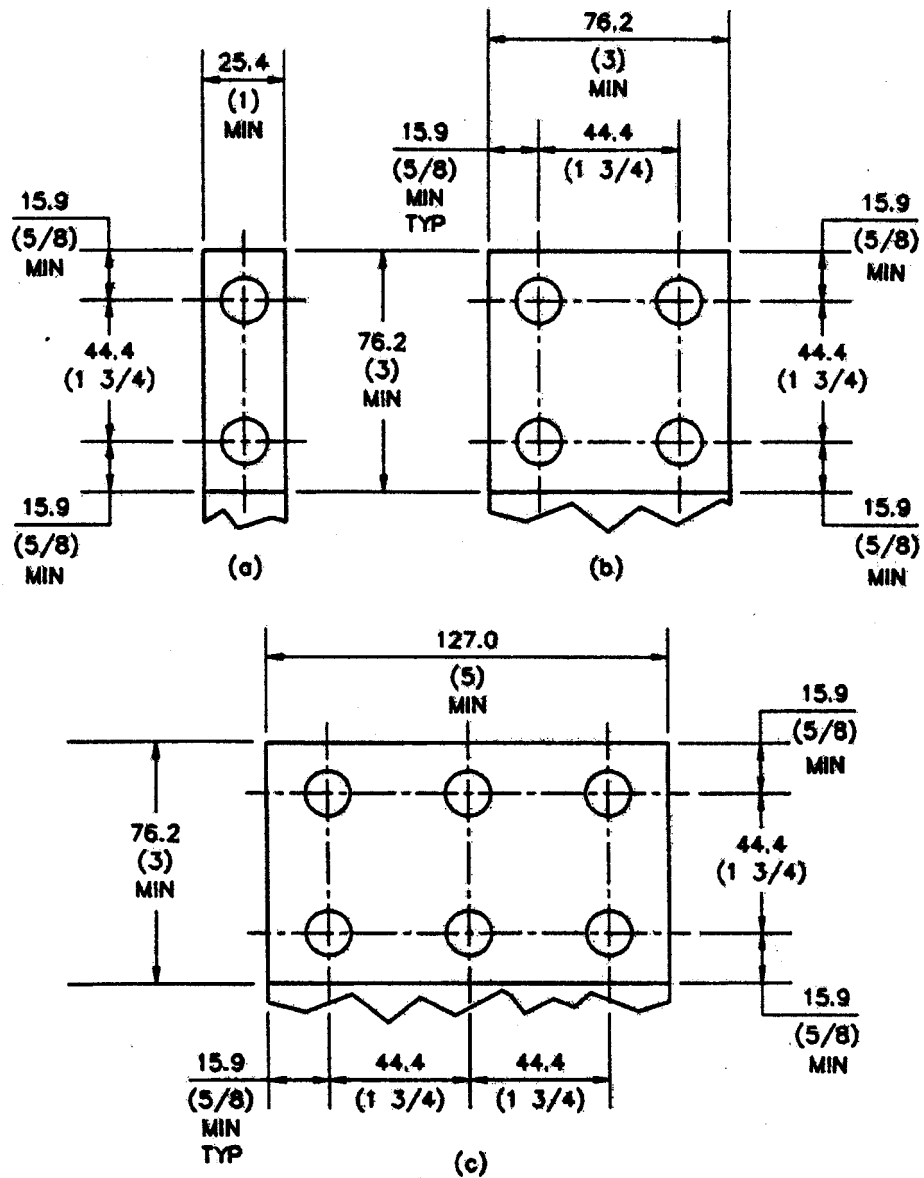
Arrangement Of Bolt Holes In Terminal Pads
